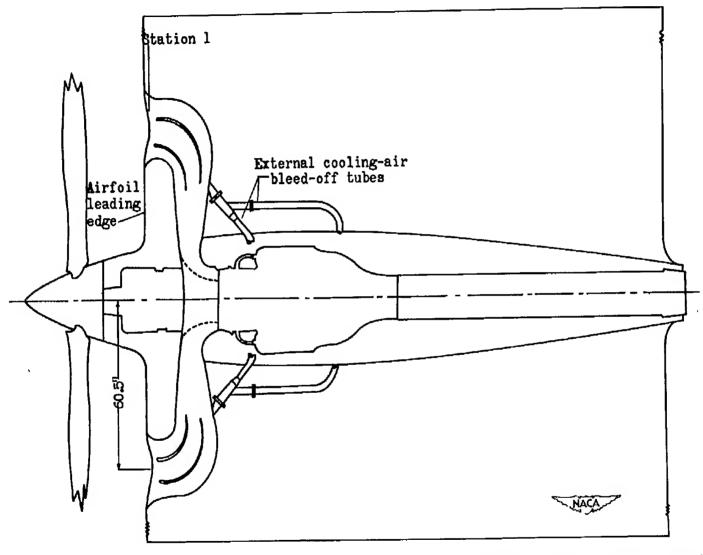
Sketch of TG-100A gas turbine-propeller engine installation showing location of wing ducts and inlets.
